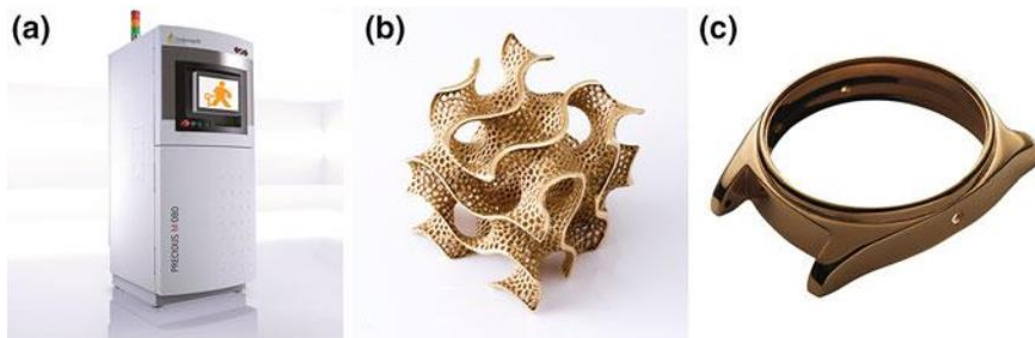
a) Direct Metal Laser Sintering machine for jewelry, b) Sculptural design printed in gold, c) 3D printed gold watchcase.
